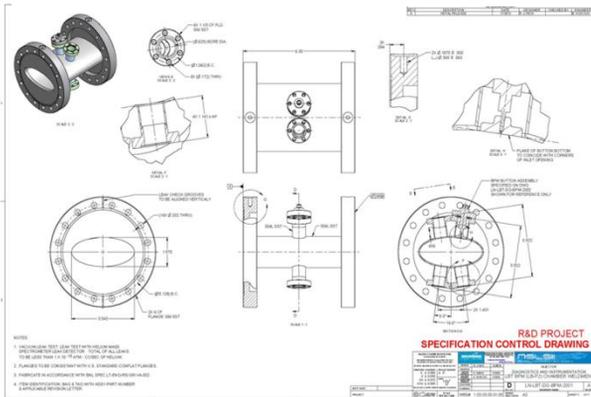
Elliptical (40 x 90 mm) chamber assembly.
